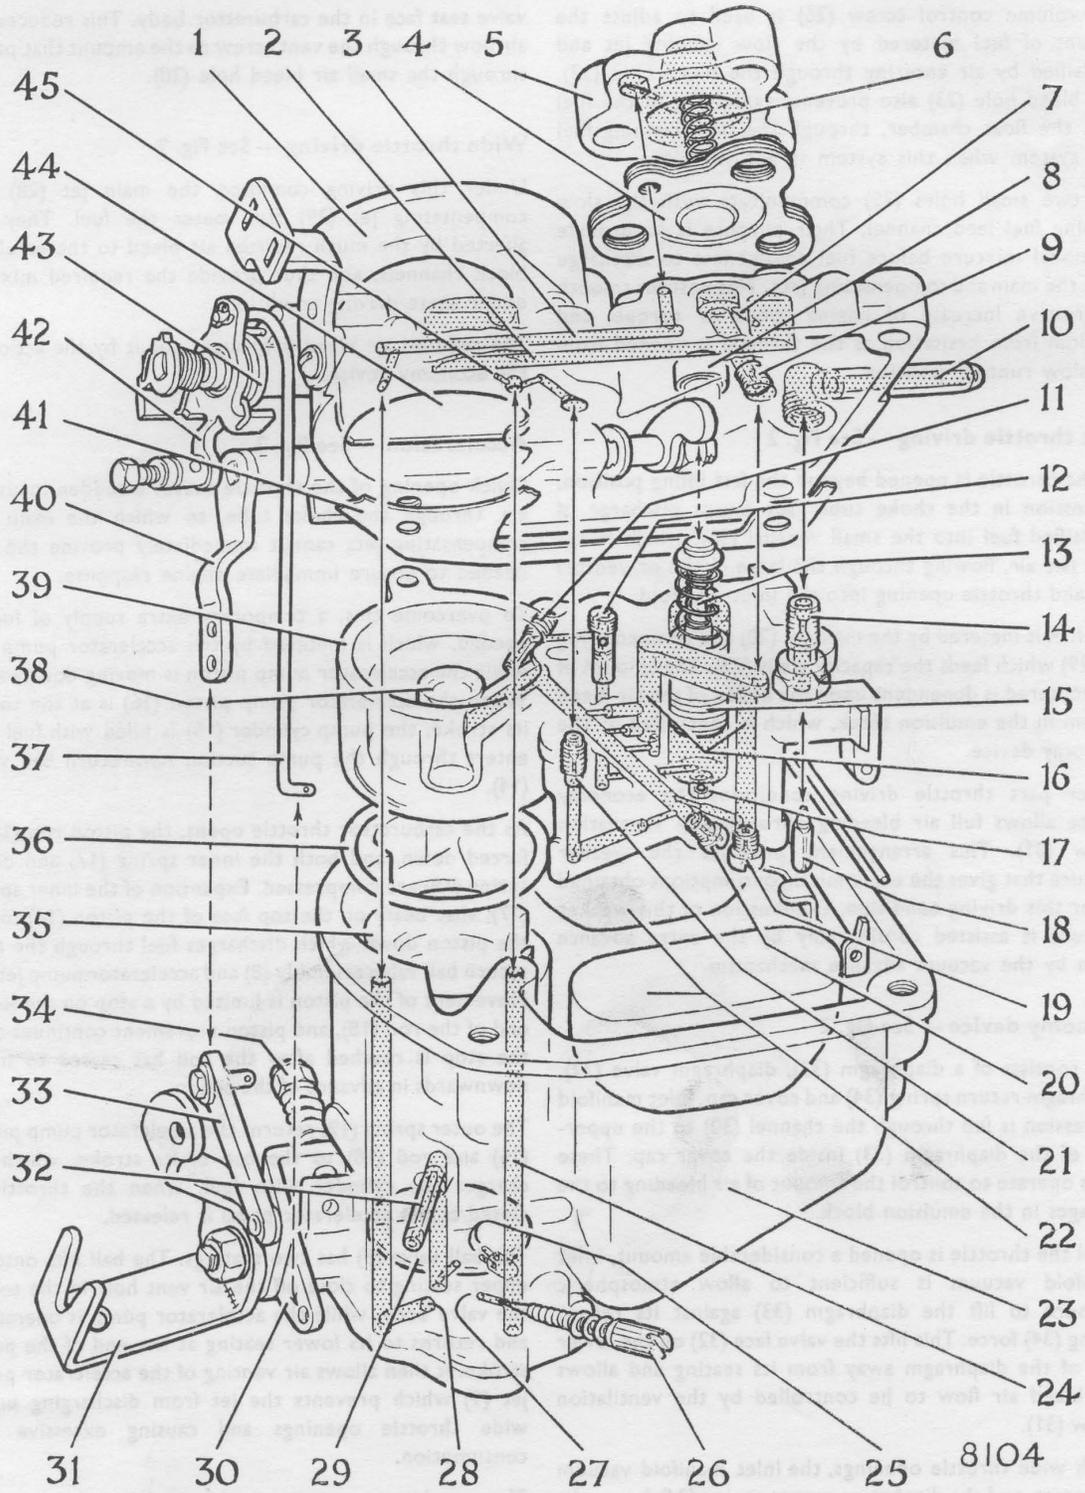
Zenith IV carburettor—External and internal details, jets and drillings
